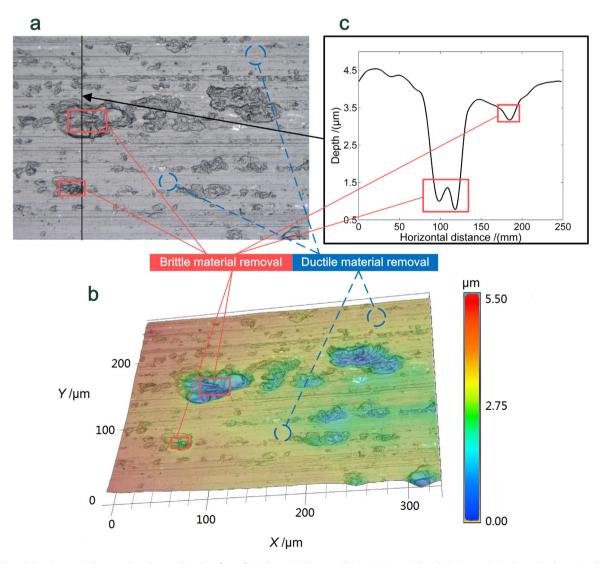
Brittle and ductile material removal on the machined surface of K9 glass. Grinding conditions: W40 resin-bonded-diamond grinding wheel; cutting depths 5 µm; wheel speed 25 m s<sup>-1</sup>, feed rate 60 mm min<sup>-1</sup>. a 1000× magnification image; b Three-dimensional measurement of a; c Two-dimensional profile.
